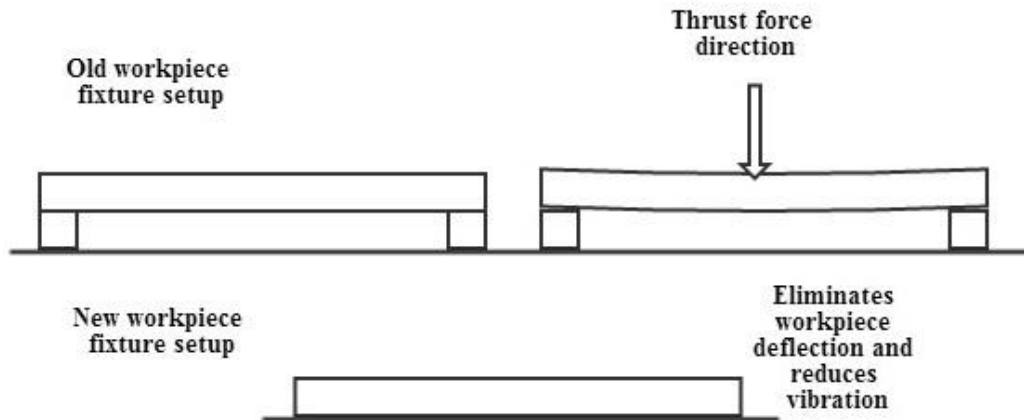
Diagram showing the change in workpiece fixturing from the old accelerated drill test employed by the partner organisation to the new workpiece fixturing employed during the preliminary drill test design phase. Clamping directly to the CNC bed will eliminate plate deflection caused by the thrust forces during drilling, as well as reduce vibration, a source of variance from the machine tool system.
